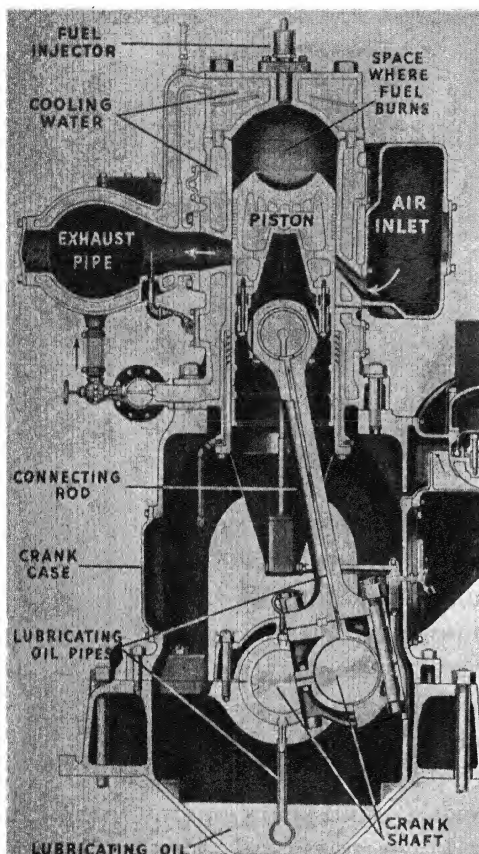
A cross-section view of a Diesel engine. Compare it with Figure 479 to see how much alike the Diesel and the gasoline engines are. However, this is a two-cycle engine in which the piston opens and closes the intake and exhaust openings as it moves up and down. (Fairbanks-Morse photo)
